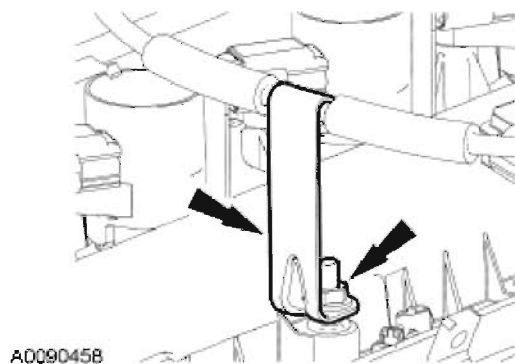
Locating Retainers & Accelerator Cable Snow Shield
